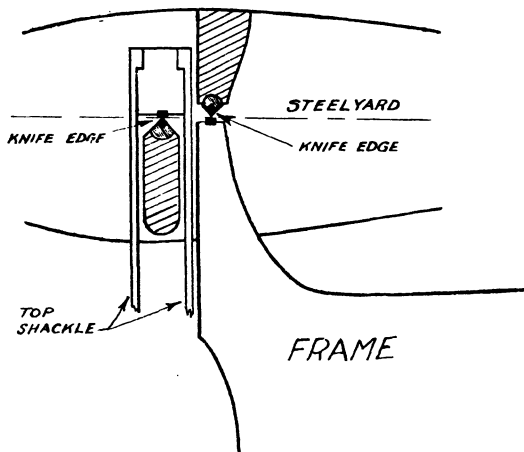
Arrangement of Knife-edges and Bearings in Single-lever Testing Machines.
